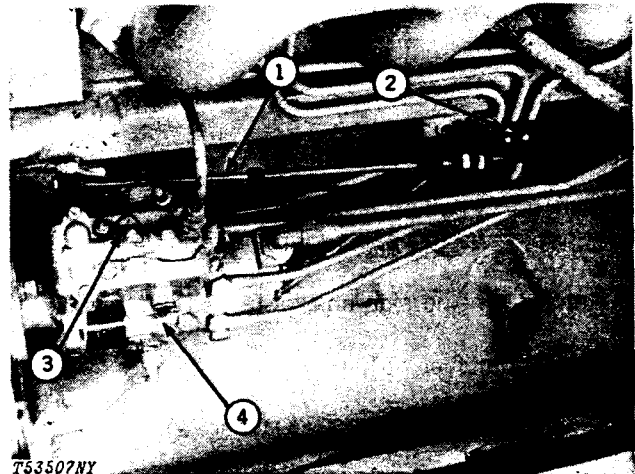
Speed Control Cable and Fuel Shut-Off Wiring
